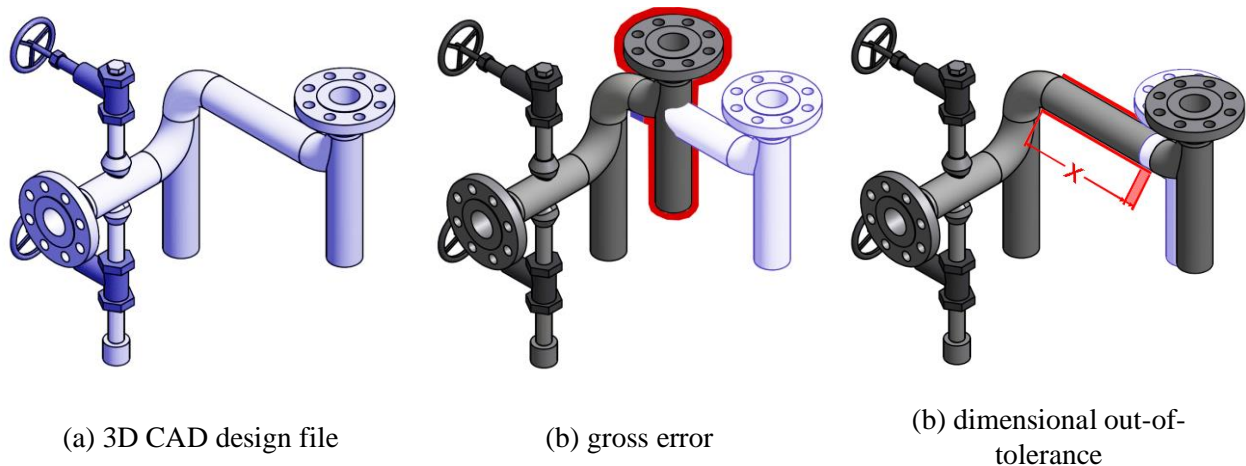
Two classes of geometrical defects in pipe spools, (b) gross errors and (c) dimensional out-of-tolerance
